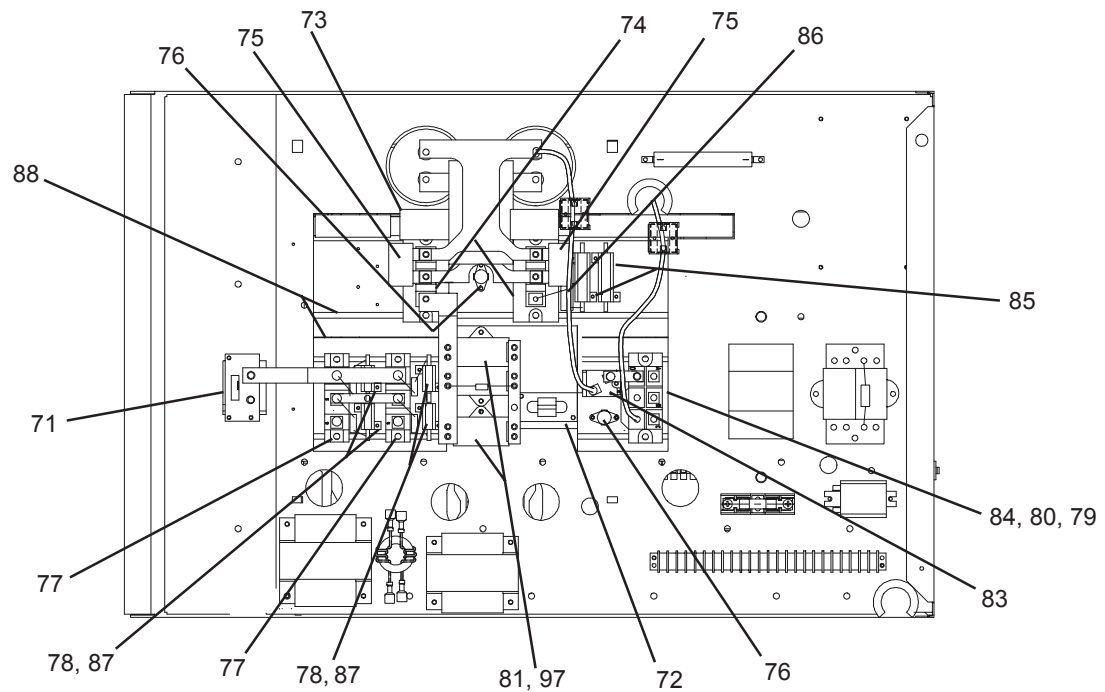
ESP-100i Top View (PCB1 Removed)
